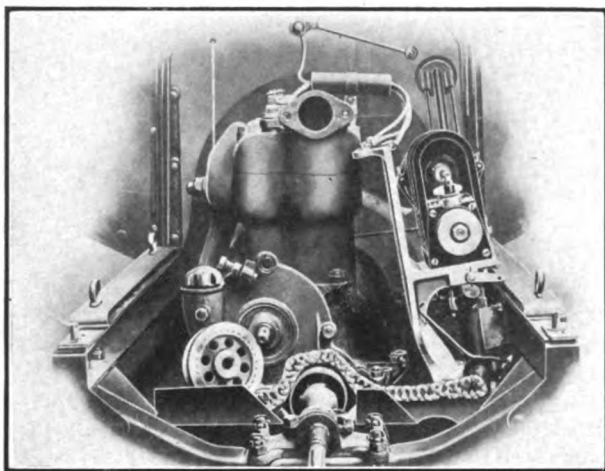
Bosch-Ford Equipment, Including a True High-Tension Magneto Driven by Silent Chain from Sprocket on Camshaft.
